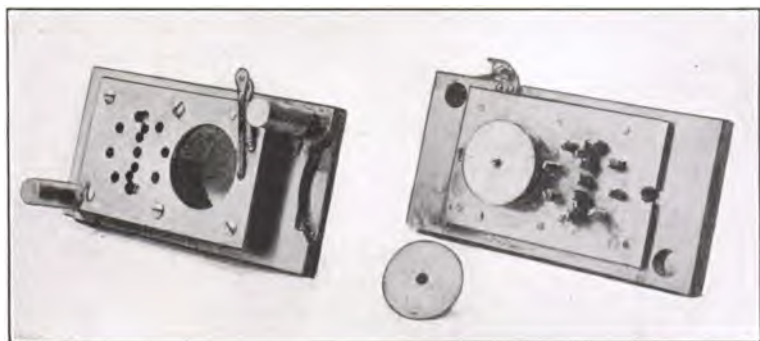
Blanking and piercing dies for coin wheel disk Fig. 449
